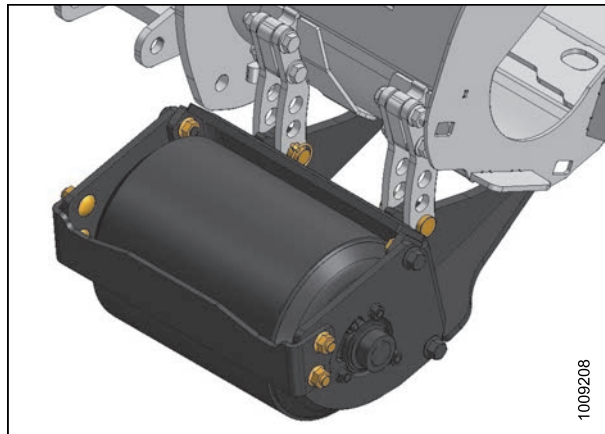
Gauge Roller (Right Side Shown — Left Side Similar)
